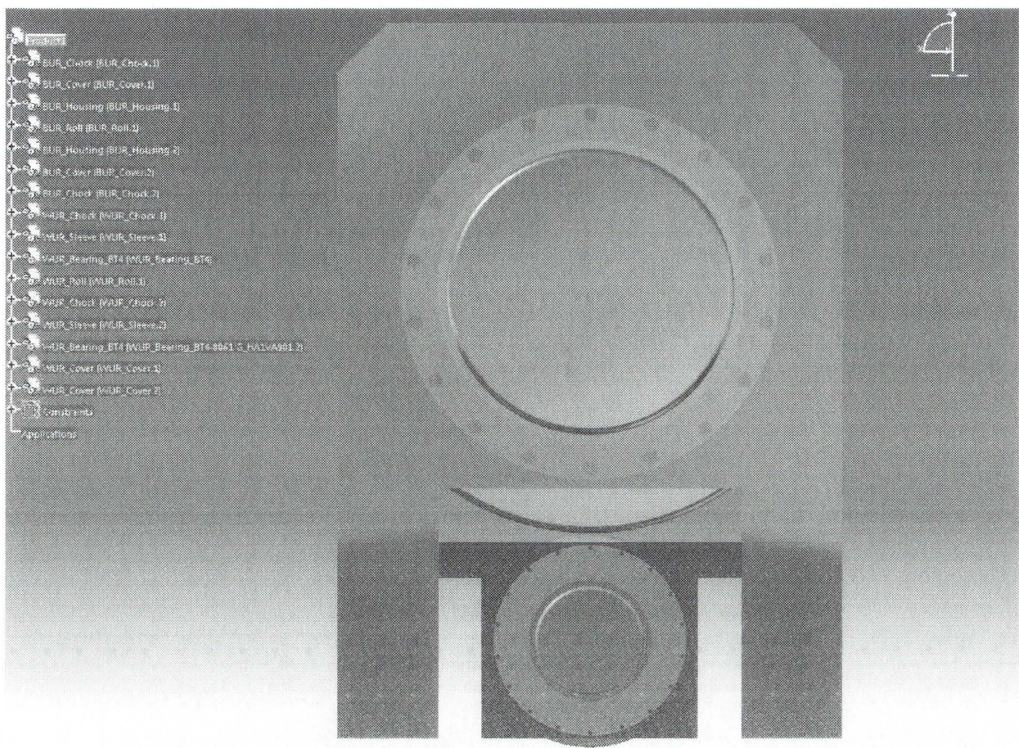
Side view of the upper rolling stand in cold rolling mill
